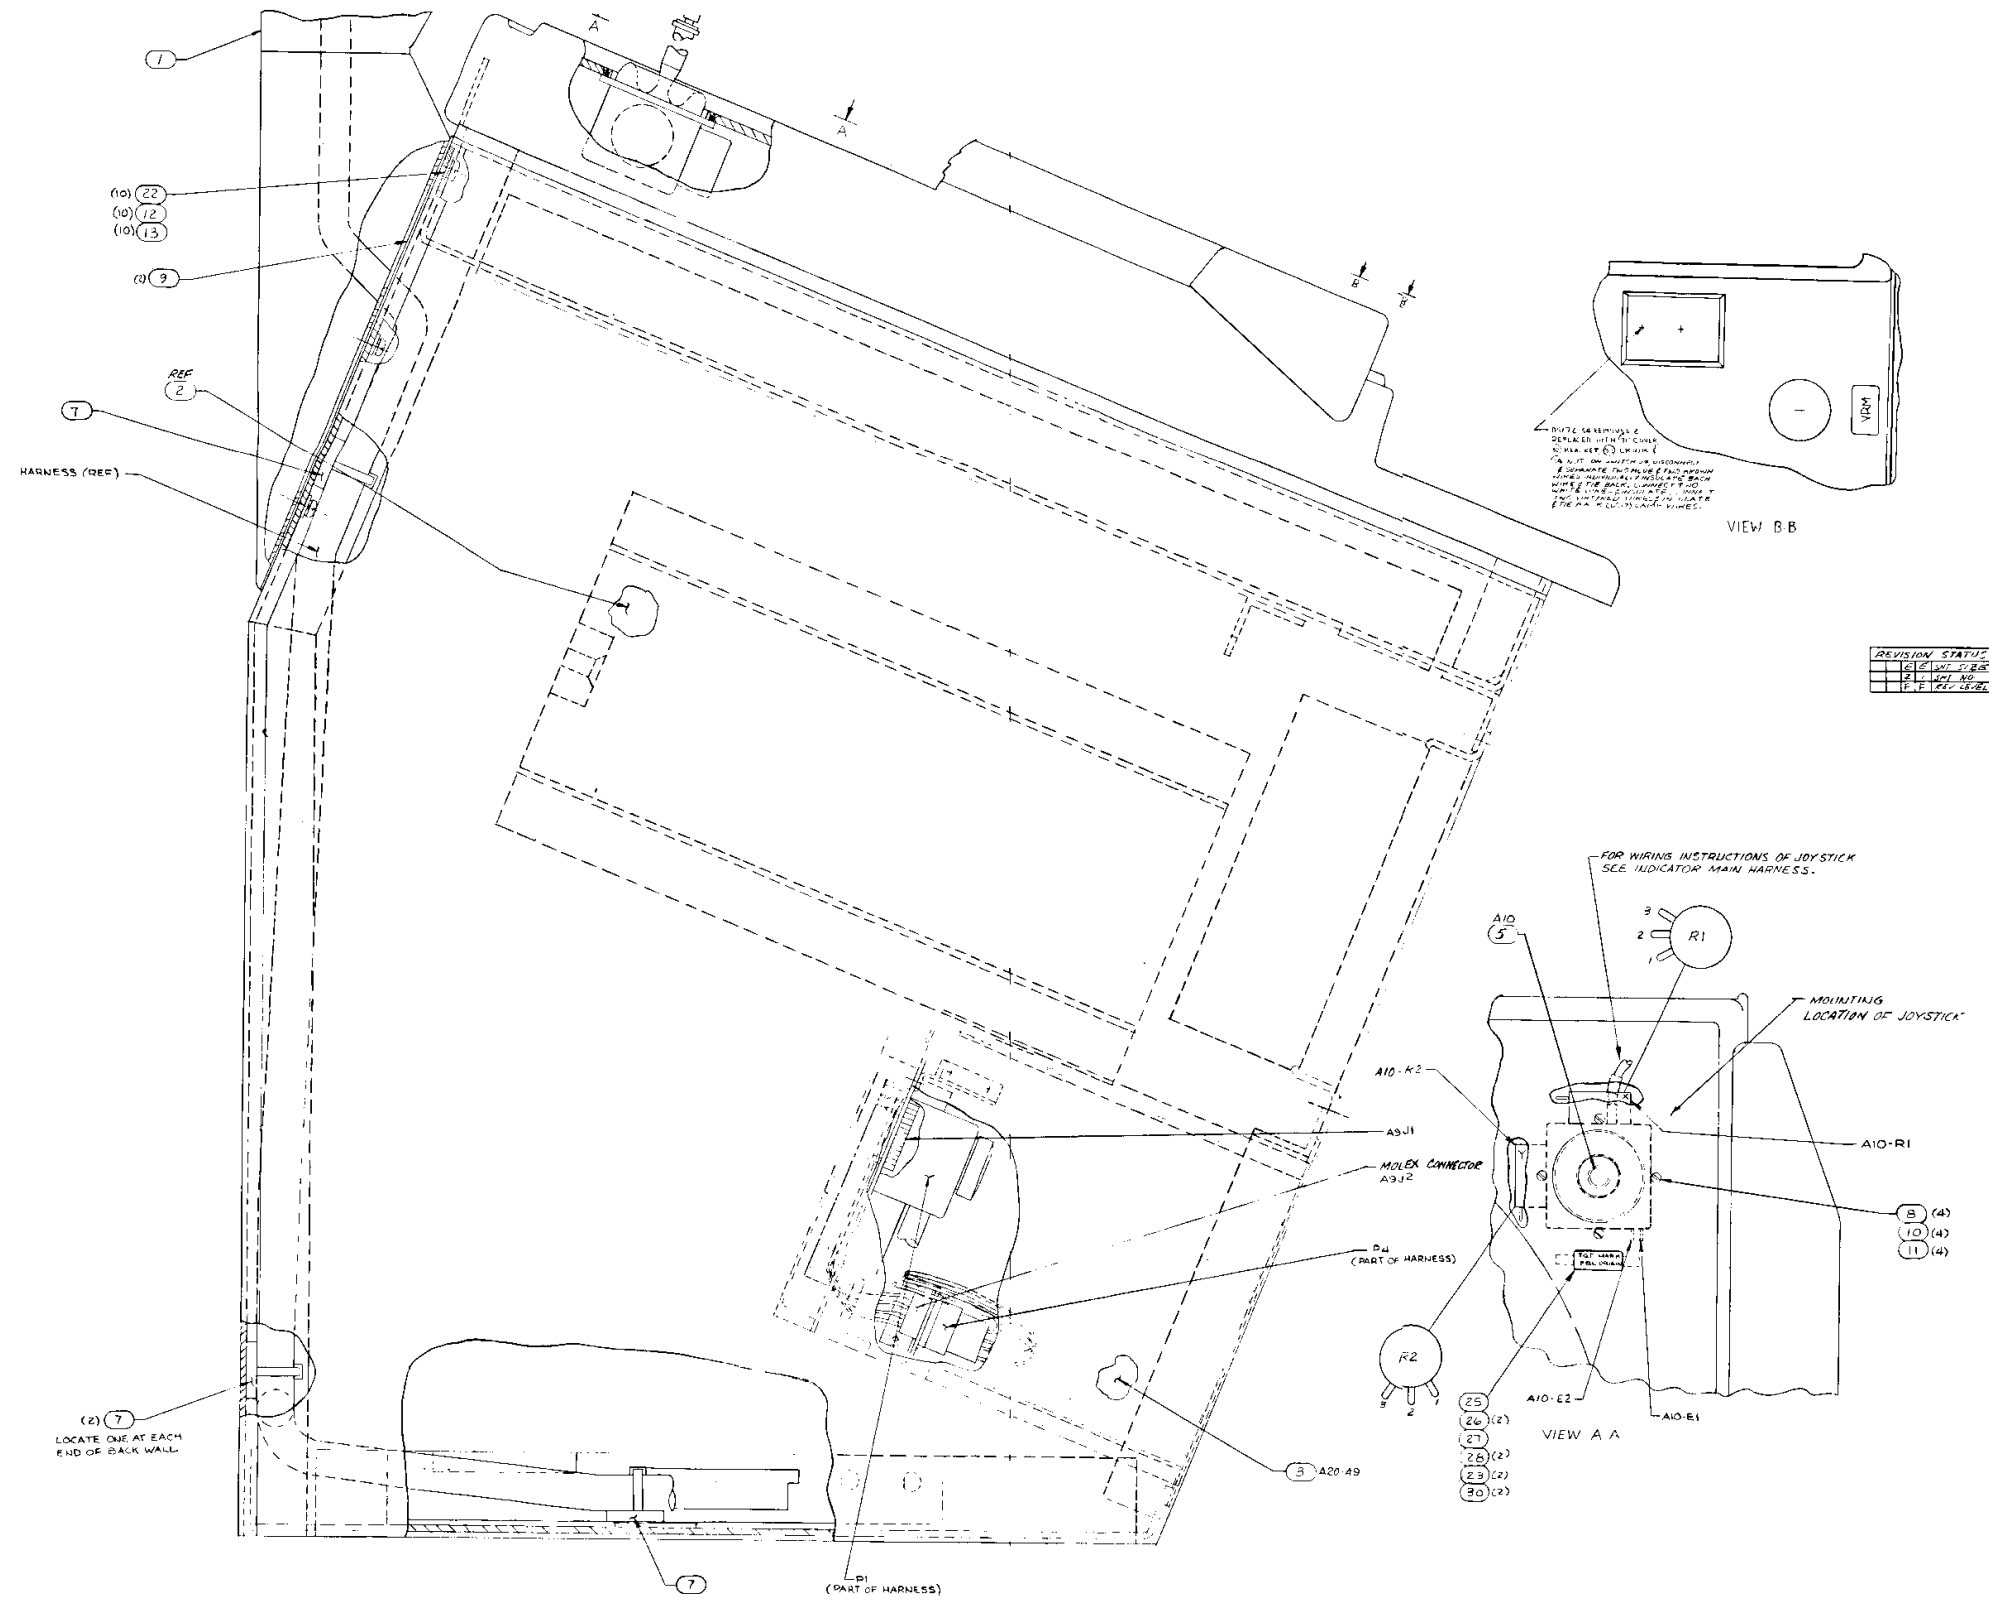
True Motion/Electronic Plotting (TM / EP) (Sheet 2 of 2) Assembly Drawing
